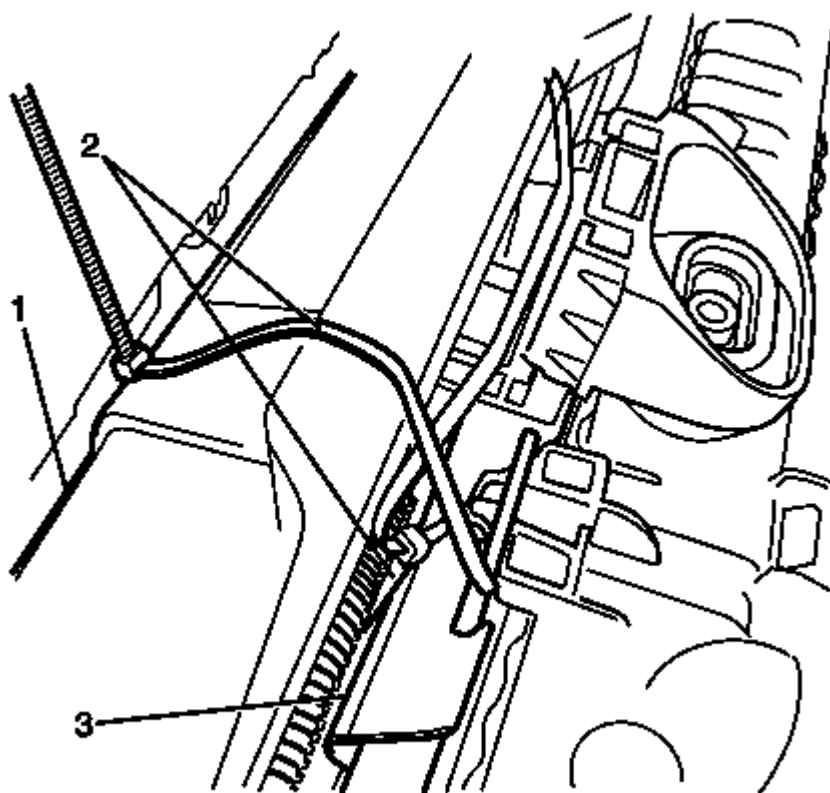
View Of Power Steering Cooler & Power Steering Gear Outlet Pipe/Hose With Spring Clamp
